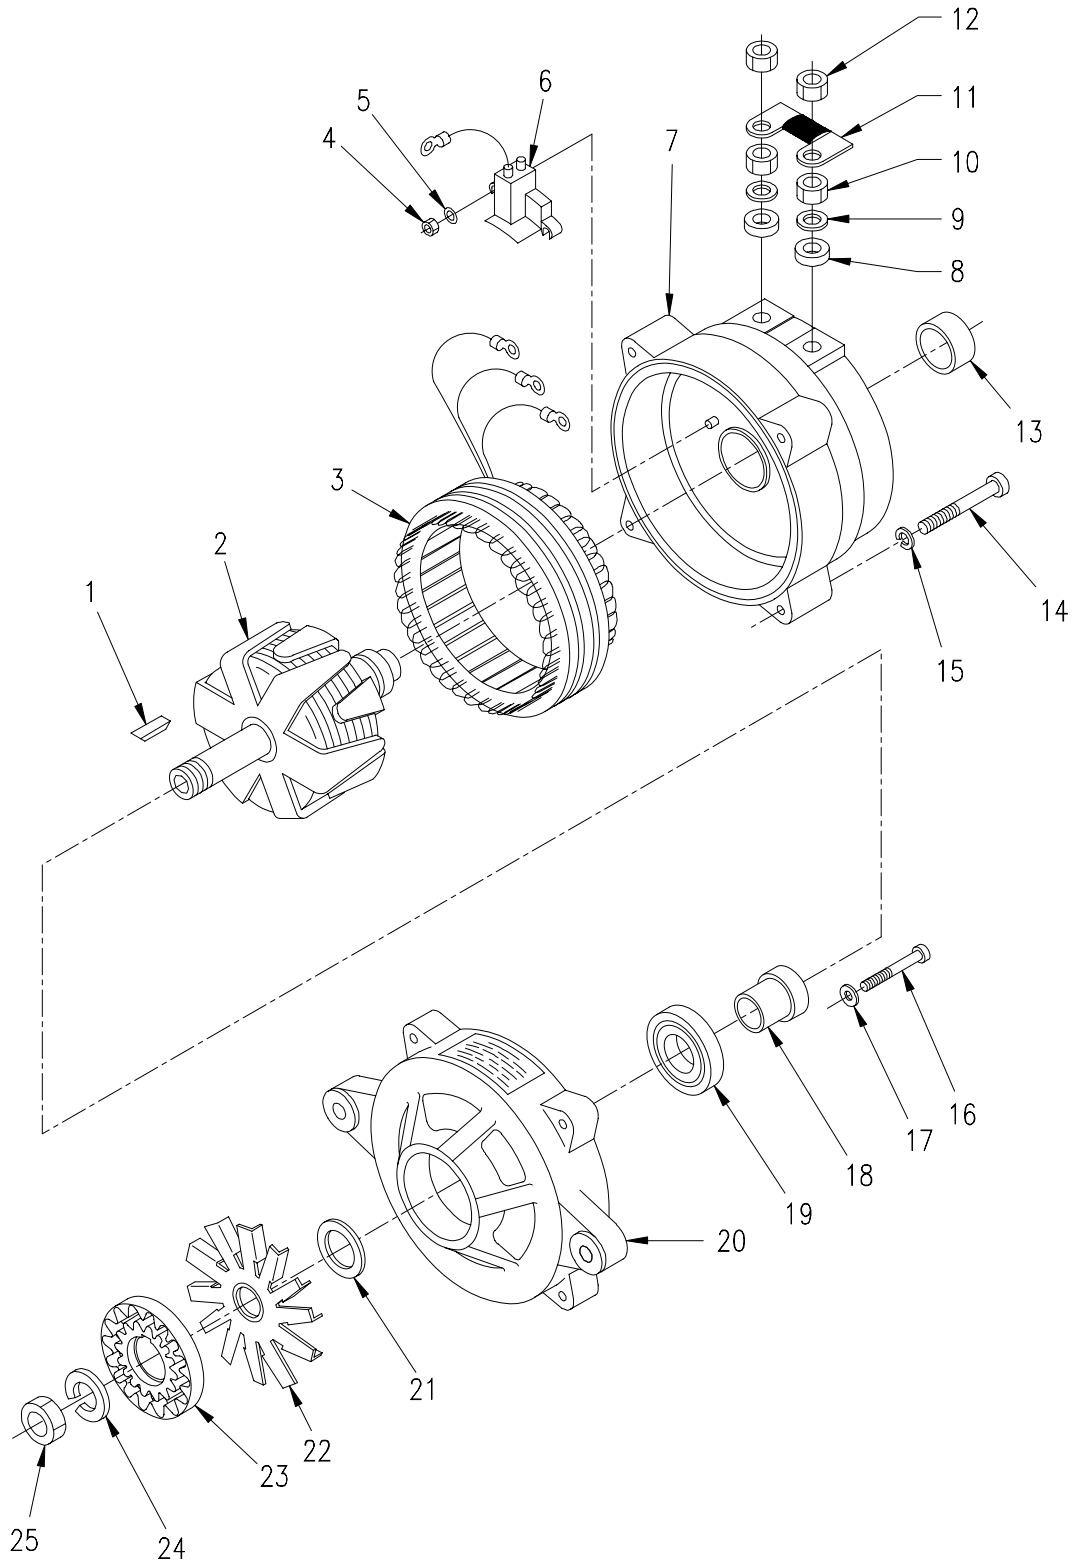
DC Alternator Assembly (MEP-501A) (Sheet 1 of 2)
